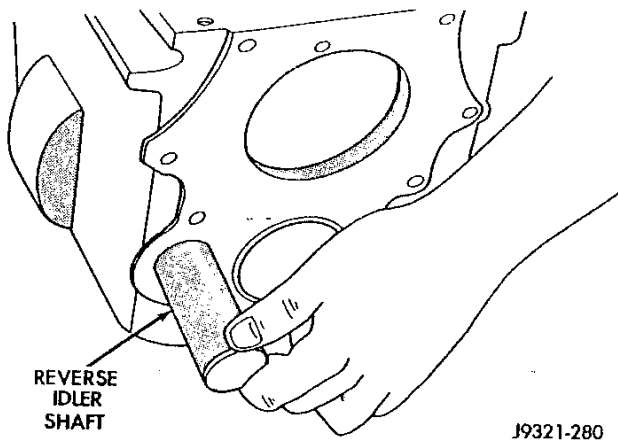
Reverse Idler Shaft Removal (New Style Gear Case)
